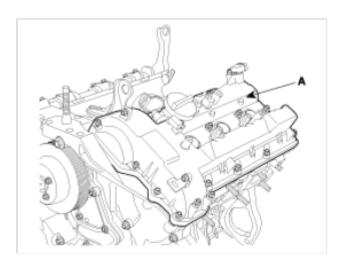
Locating MLA (Mechanical Lash Adjuster) Courtesy of HYUNDAI MOTOR CO.
